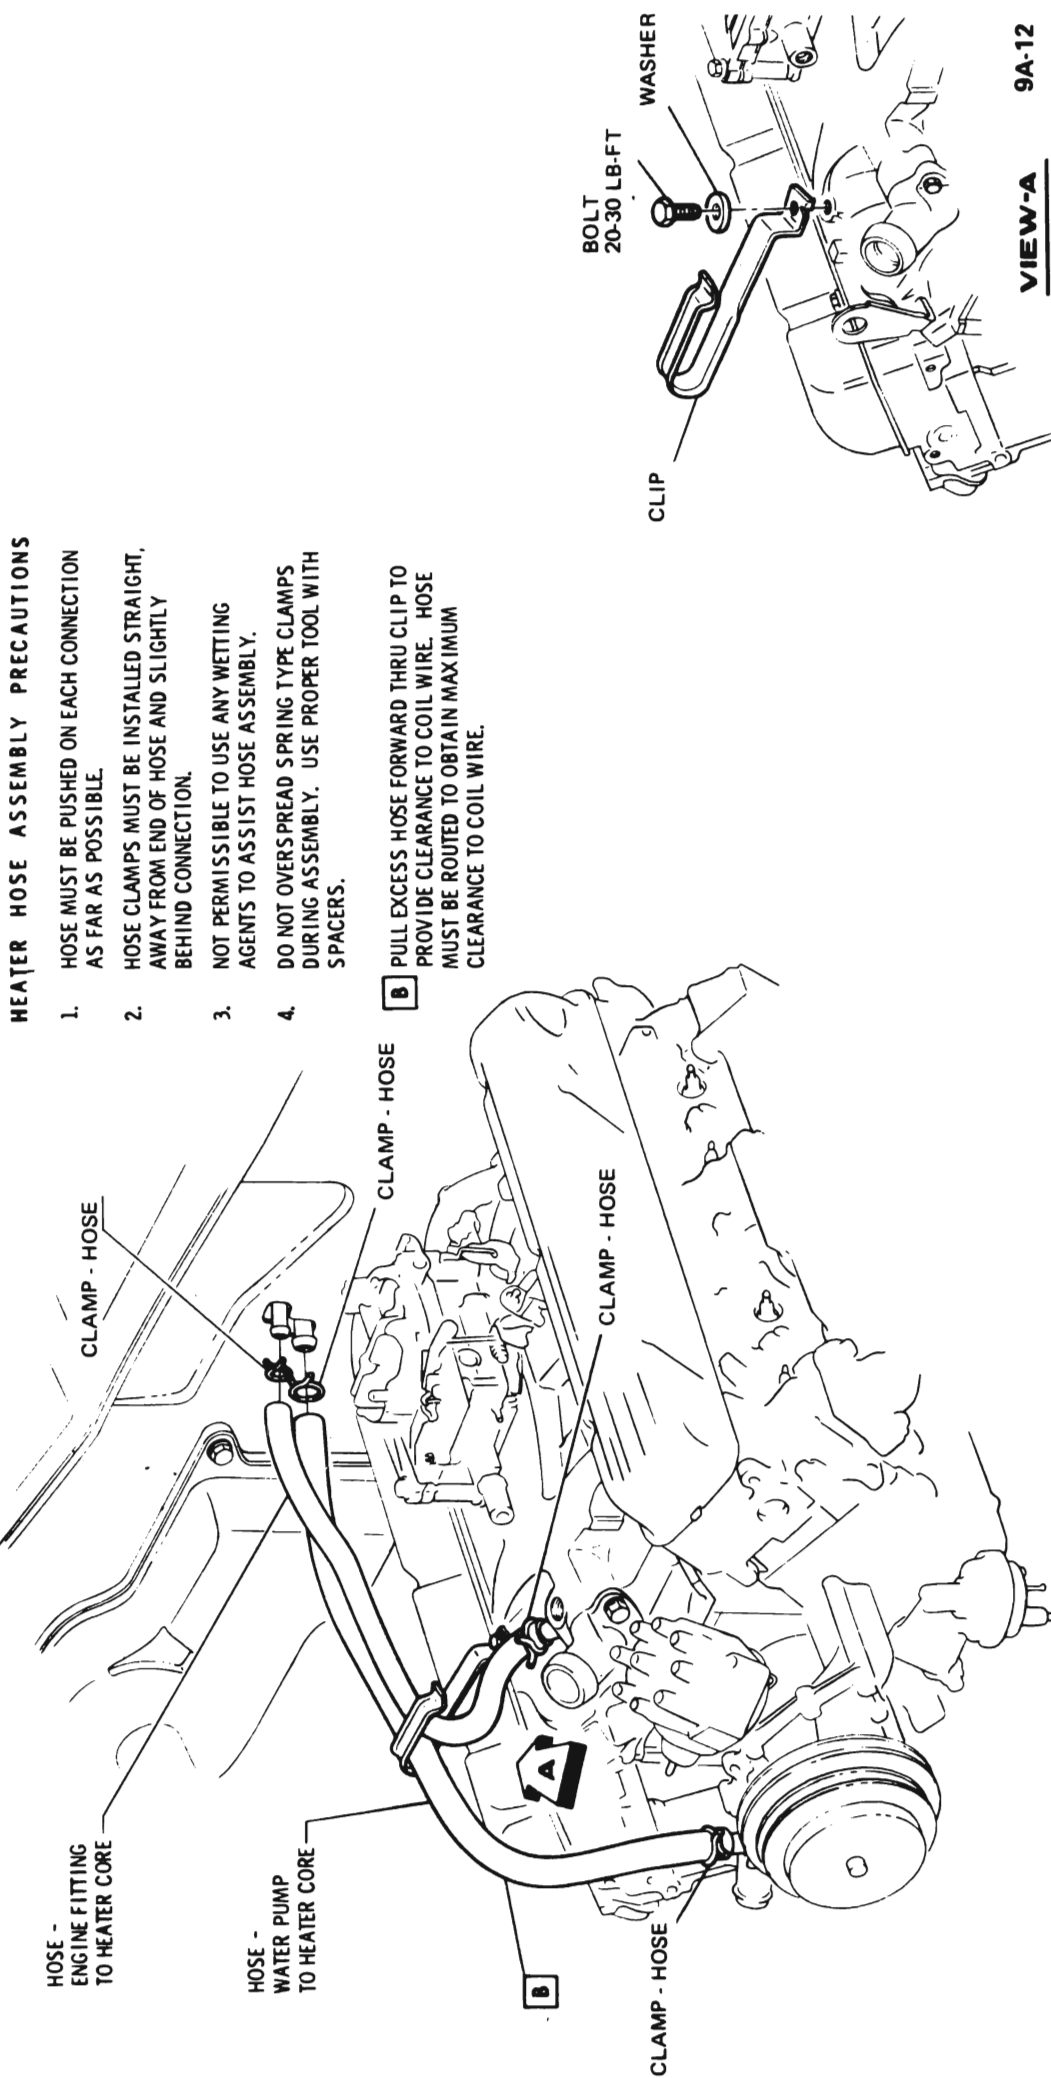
A-12 Heater and Defroster Assembly - Center Outlet - A Series
